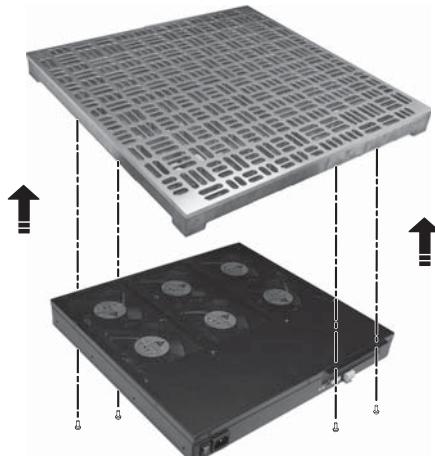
b) ADU's Mounting-hole Locations (Left and Right)
